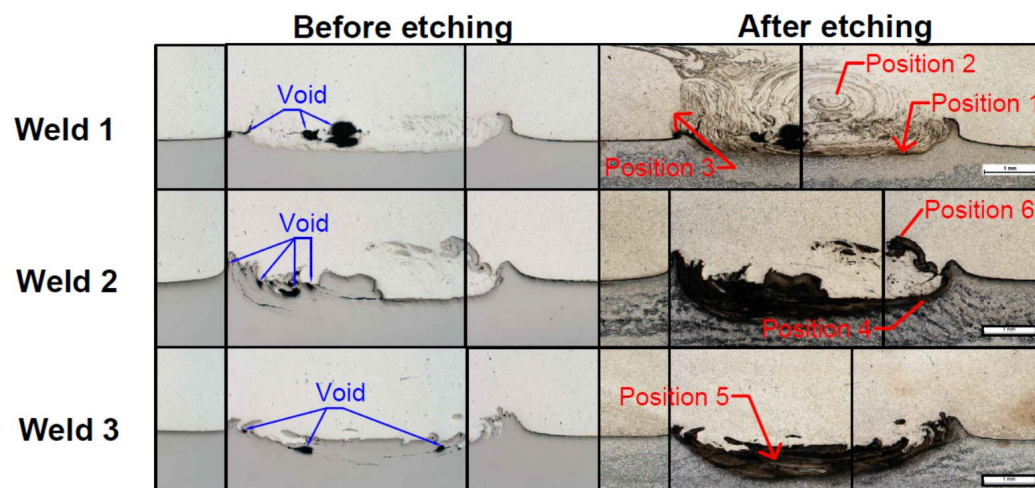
Optical macrographs of a weld 1 made using a travel speed of 100 mm/min, a weld 2 made using a travel speed of 200 mm/min, a weld 3 using a travel speed of 400 mm/min.
